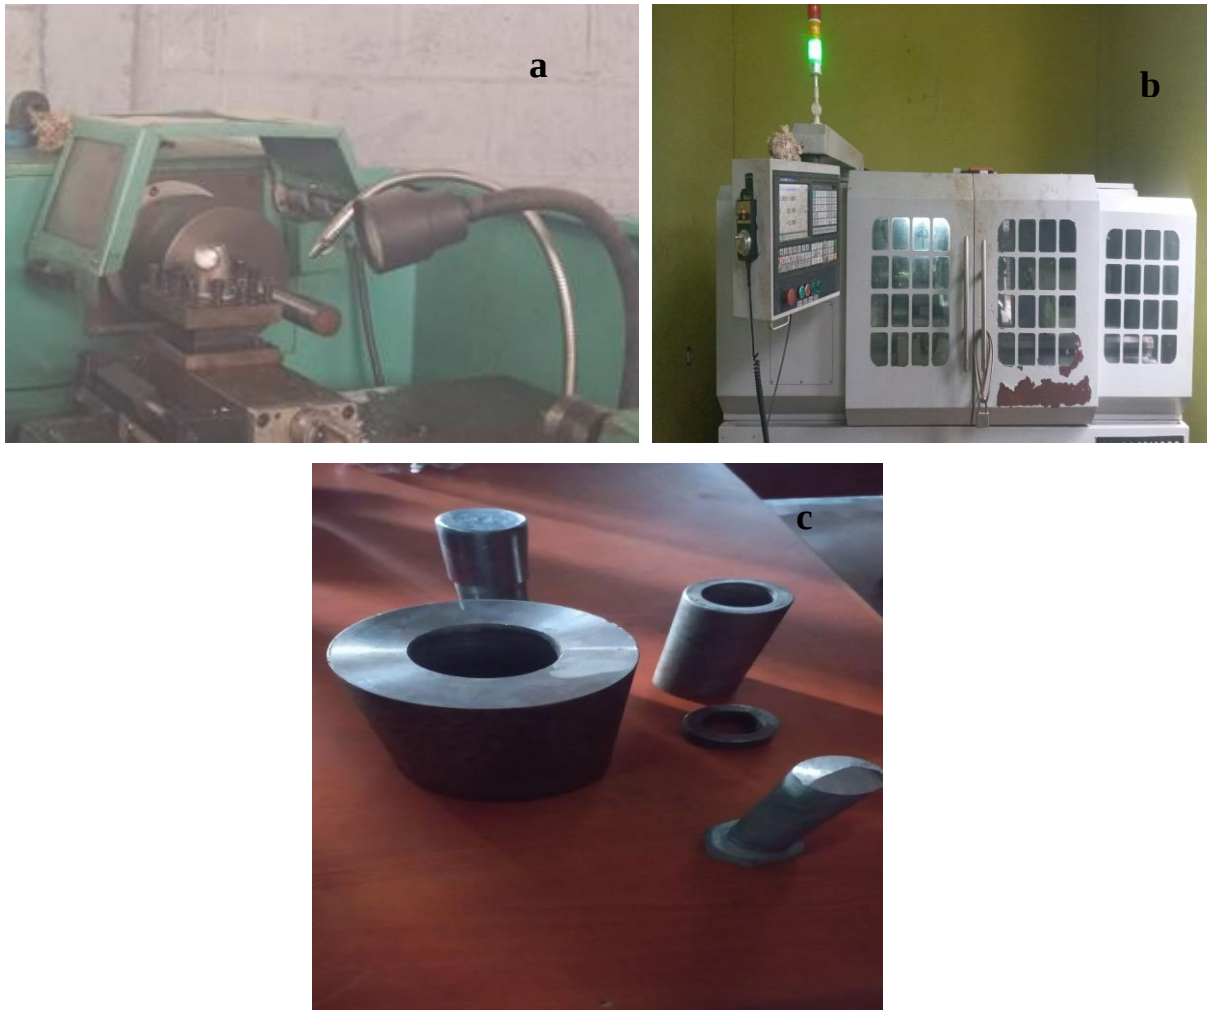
a) Conventional lathe b) CNC lathe c) Fabrication die and container
